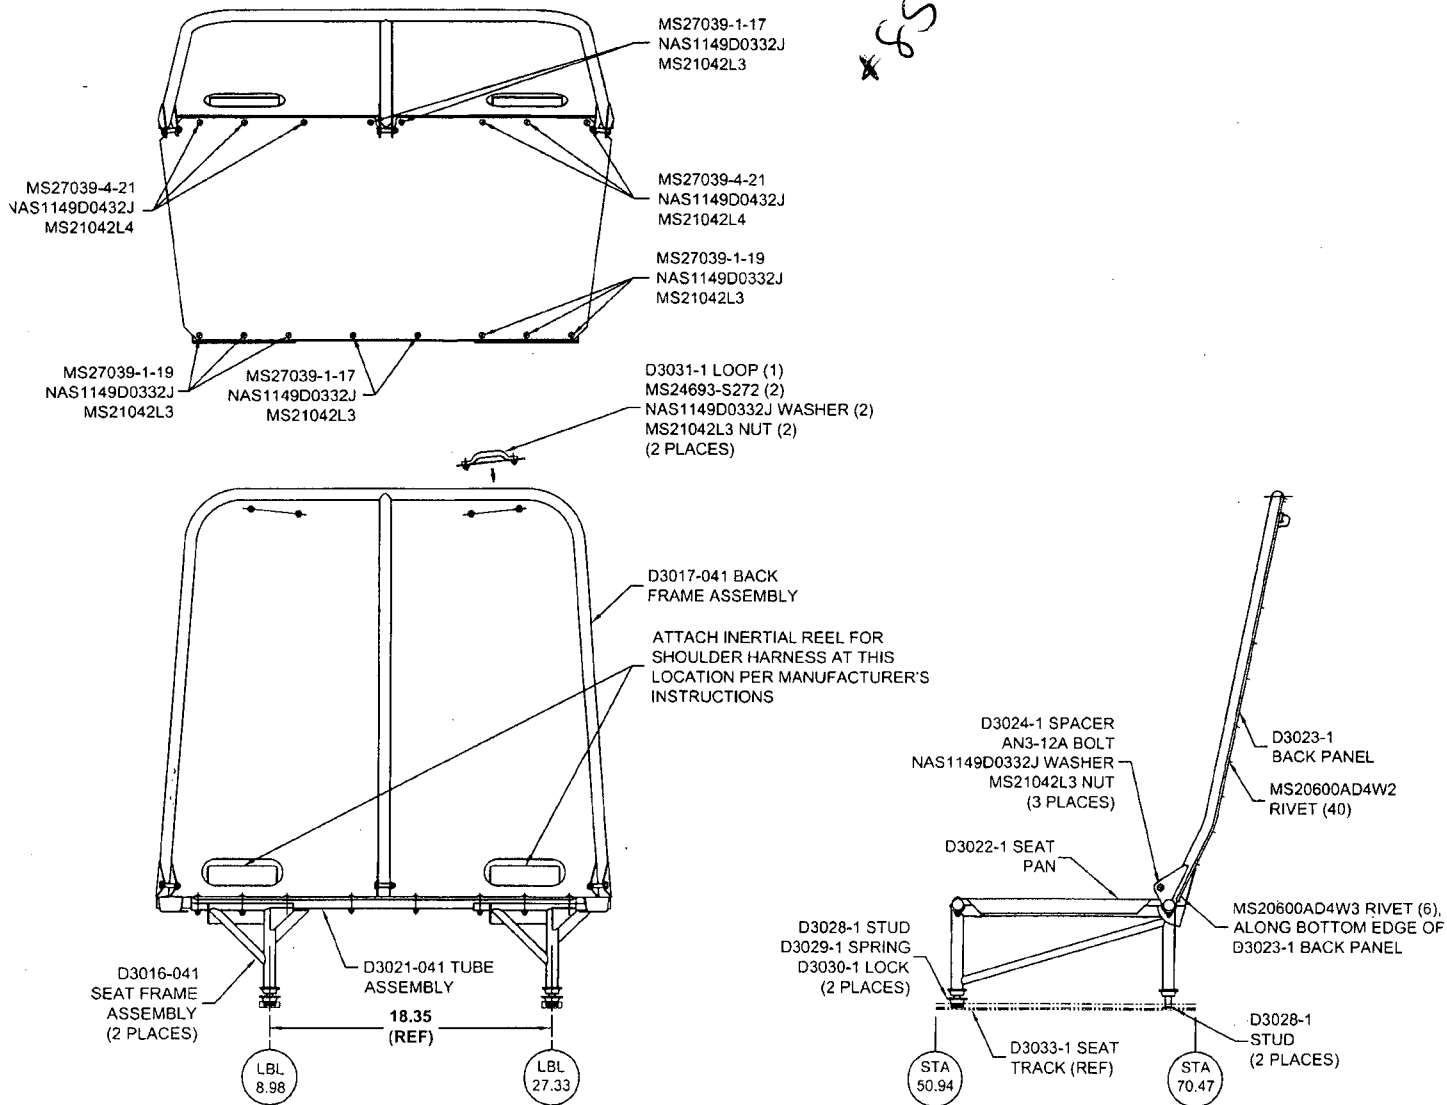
Installation of D350-689-041 Dual High Back Seat Assembly
